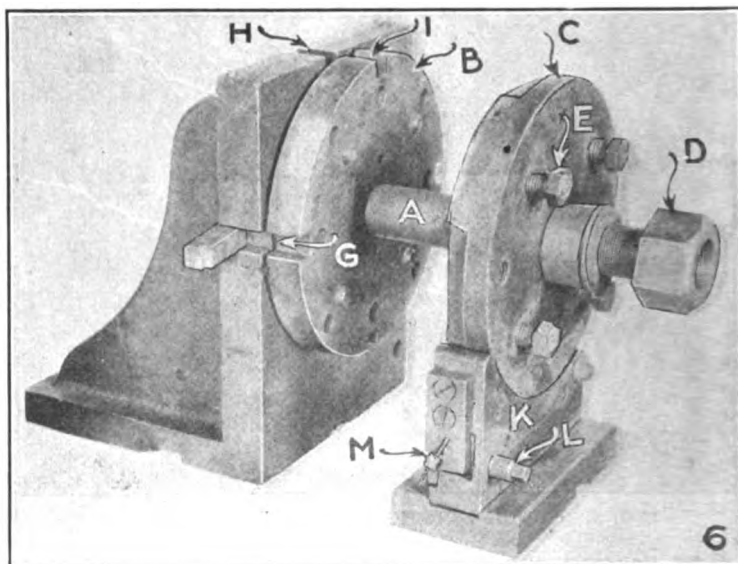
FIXTURE FOR SQUARING ROD BRASSES
